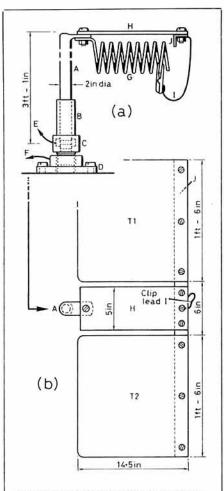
Compact monopole detail (but not to scale). a) Elevation view, with the capacitive top hat not shown.
